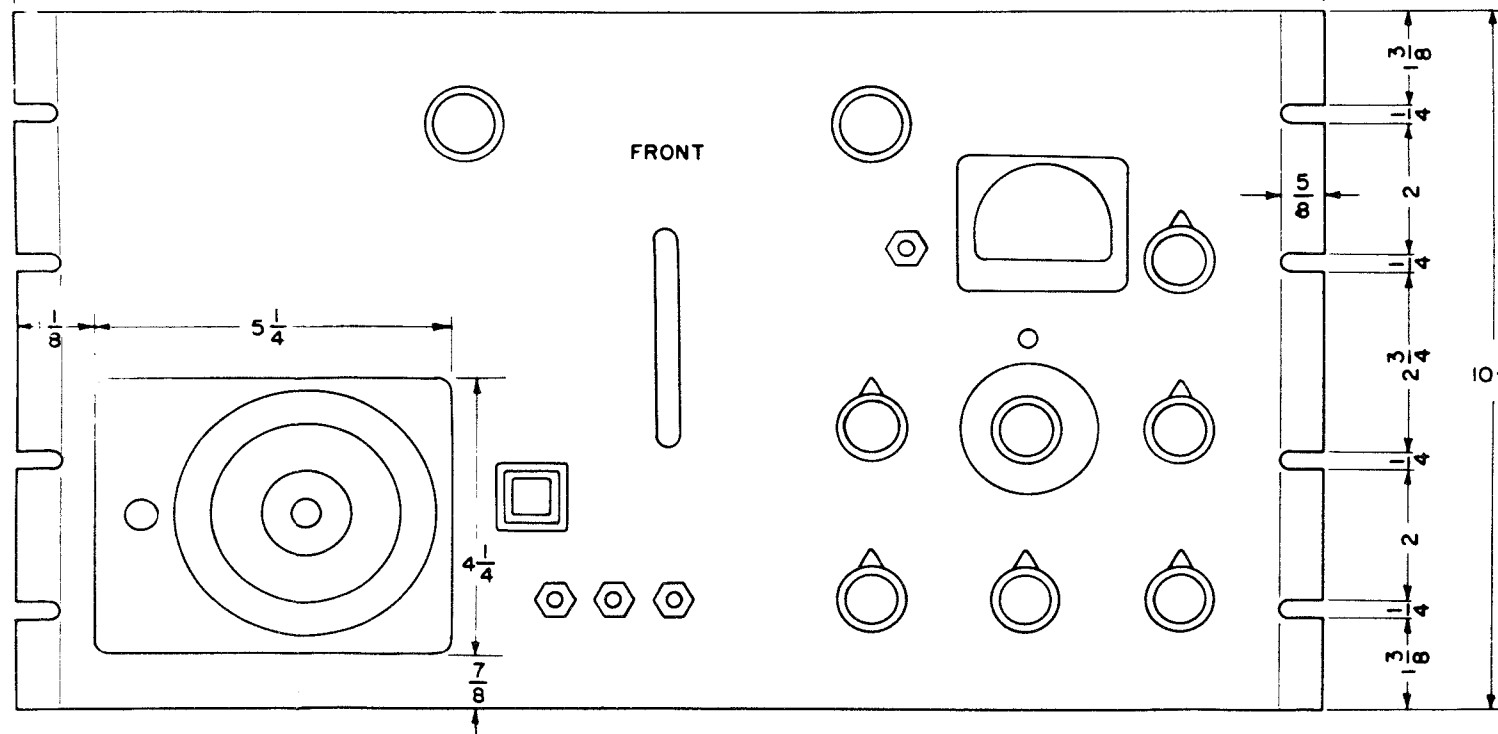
RF Oscillator O-165/UR, Outline Dimensions
